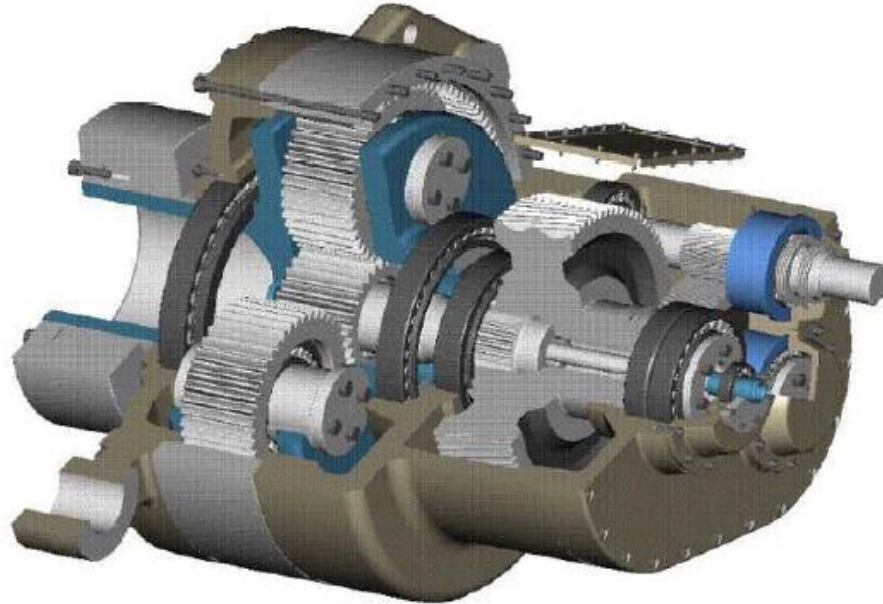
A typical planetary gearbox used in Wind Turbine Designs.
